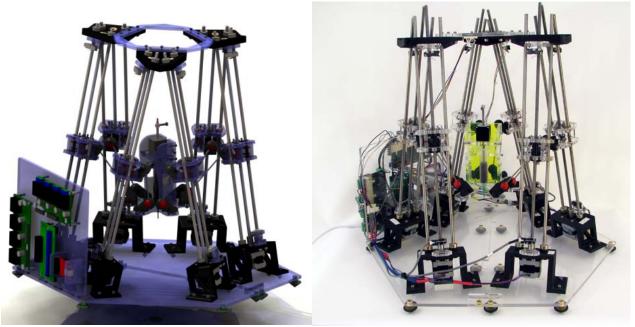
Completed Printer: CAD model (left), actual printer (right)
